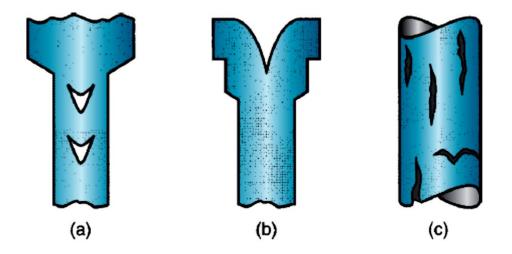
extrusion defects; (a) centerburst, (b) piping, and (c) surface cracking
